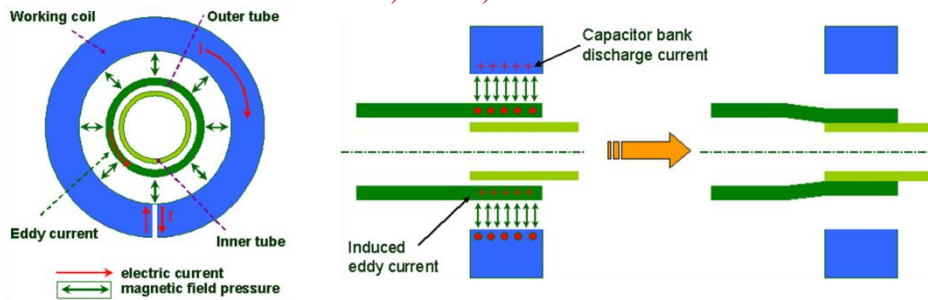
Principle of Magnetic Pulse Welding
